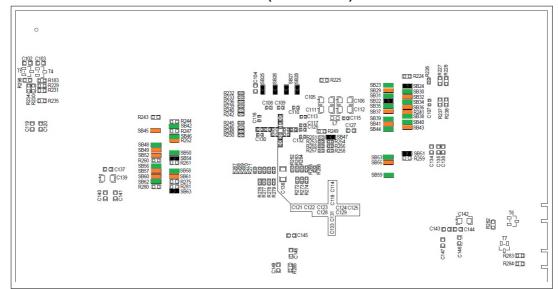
STM32756G-EVAL evaluation board motor control PCB reworks (Bottom side)
